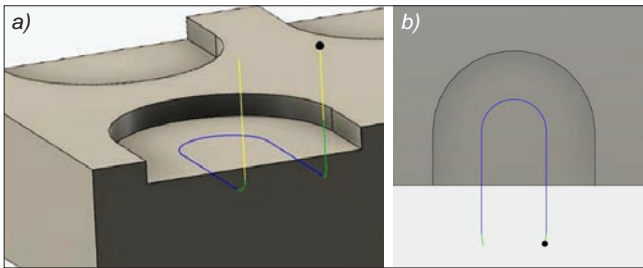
Tool path in the first machining strategy: a) isometric view, b) top view
